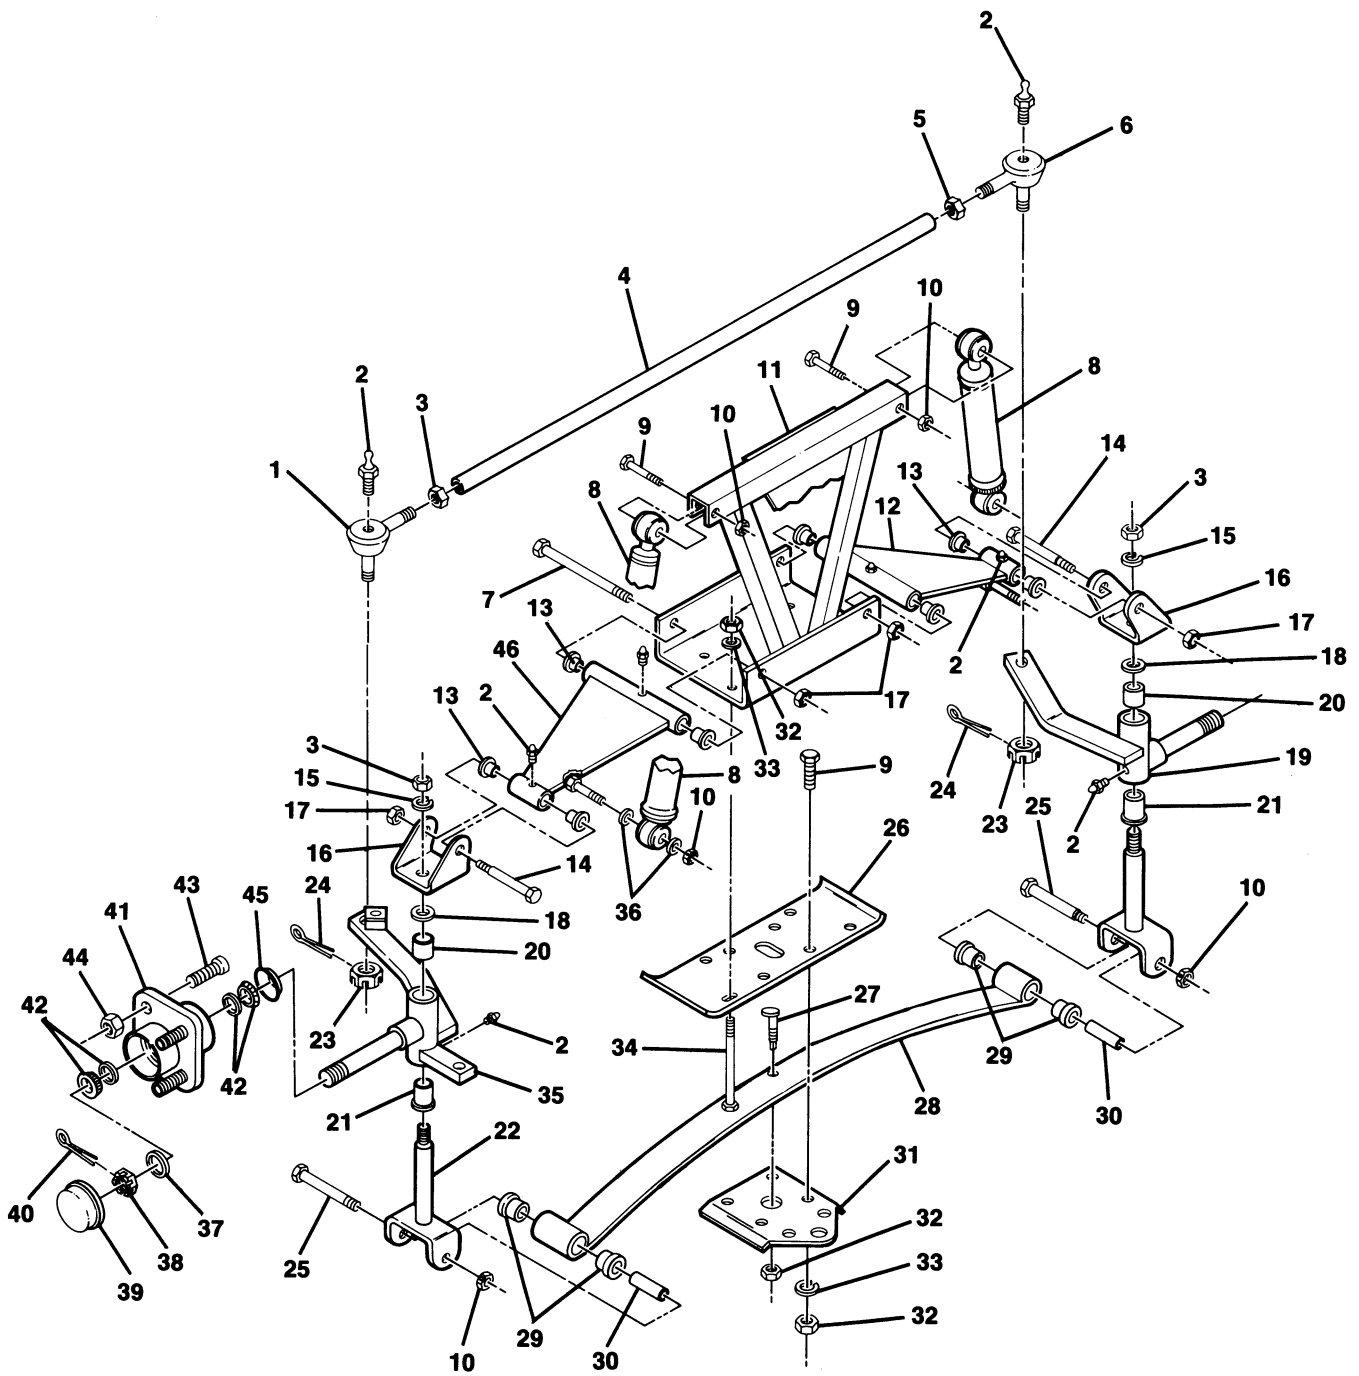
FRONT SUSPENSION ASSEMBLY. SEE LIST 3-3.
